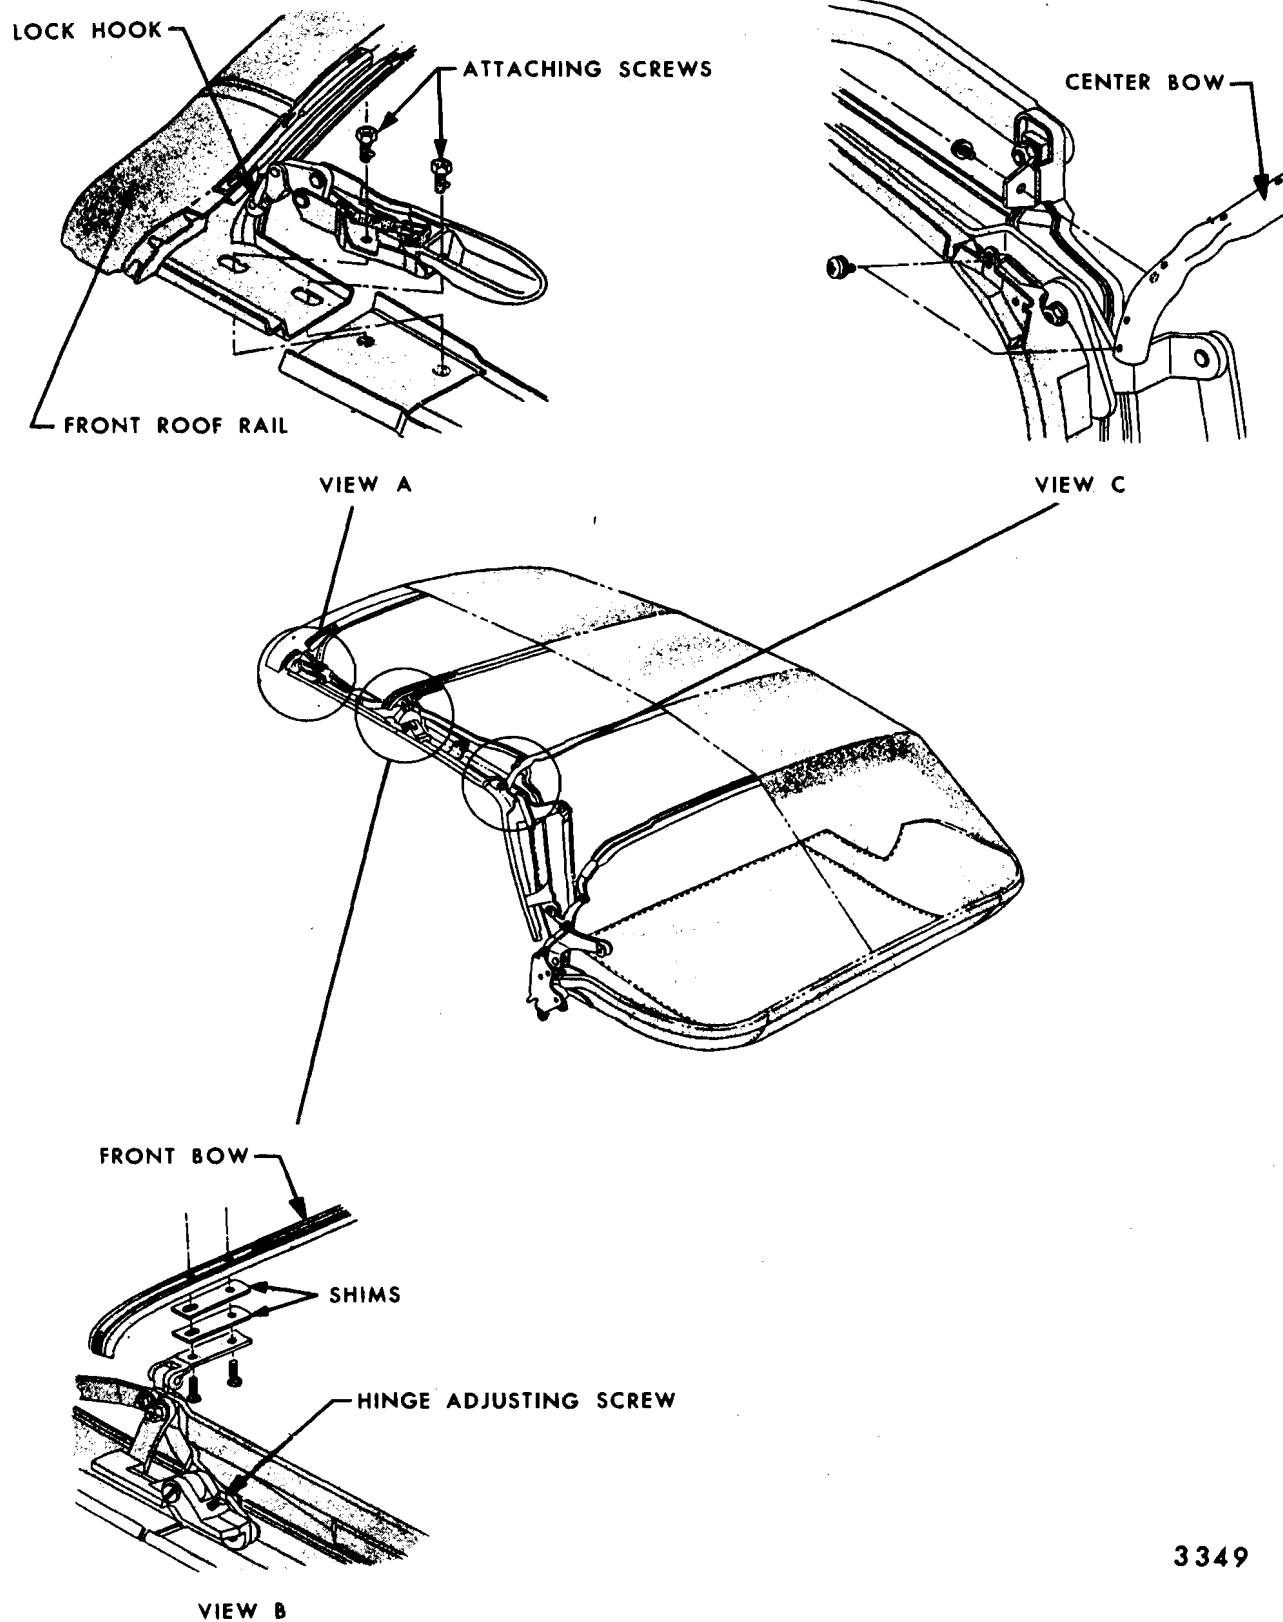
Folding Top Adjustments - "B. & C" Styles Shown. "A" Styles Similar
